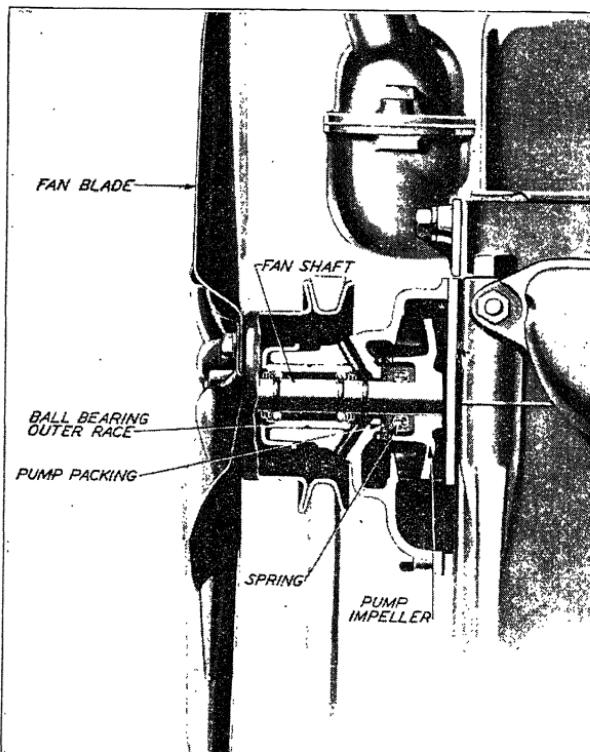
1939 Chevrolet Water Pump and Fan Shaft
